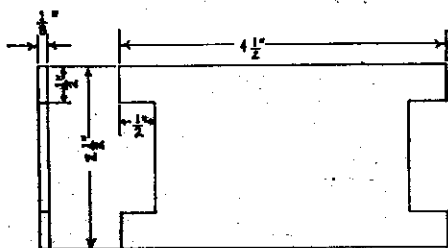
Winder. Material: Packing; fiber, hard sheet, Specification HH-P-91; dimensions in inches: Unless otherwise specified; tolerances: Fractions plus or minus 1/32 inch.
